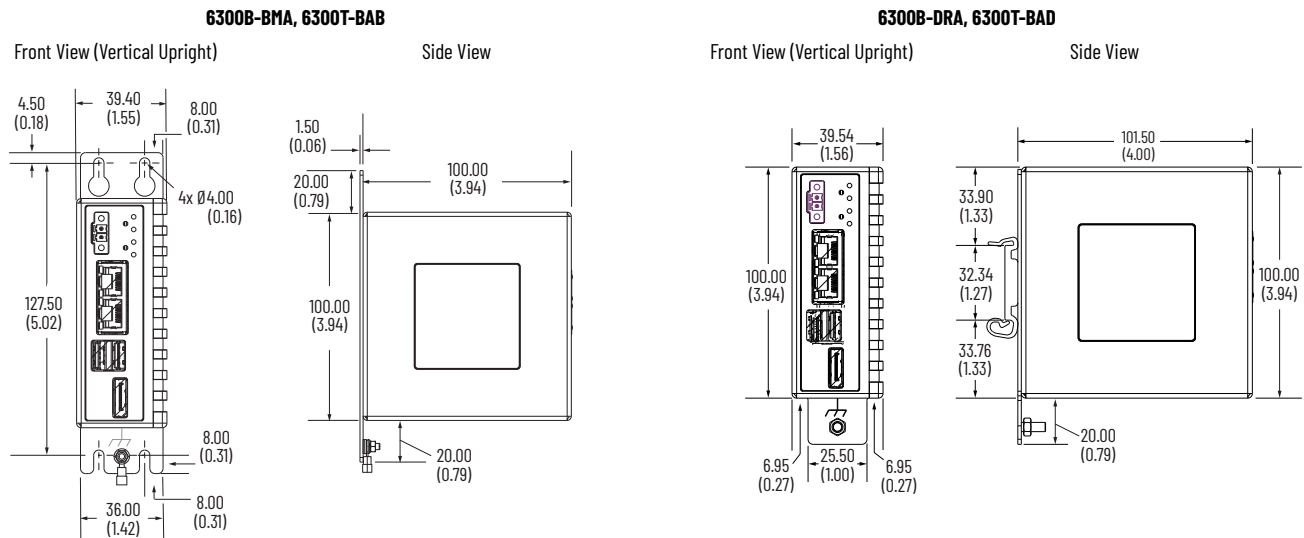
6300B-BMBE...J Box PC [mm (in.)]
